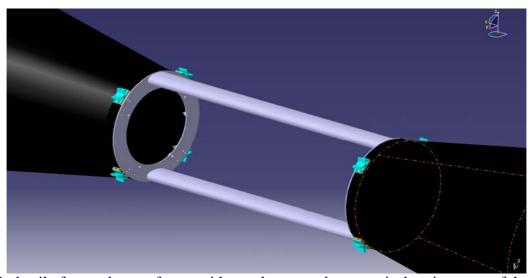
detail of central area of cone with attachment and geometrical tuning parts of the SSD
